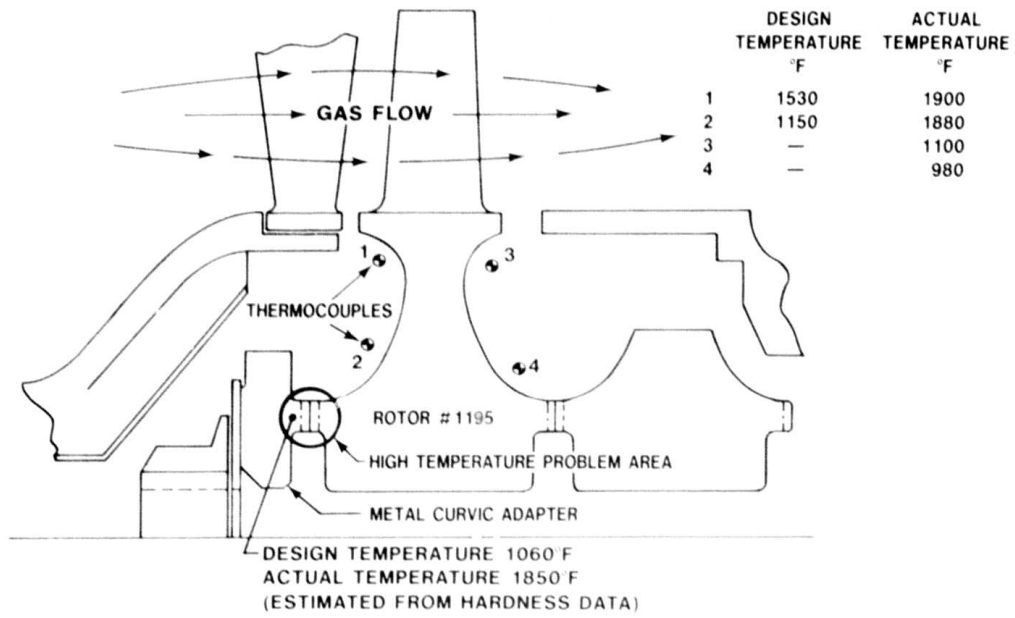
Cross-Sectional View Showing Rotor Front Face Cavity
